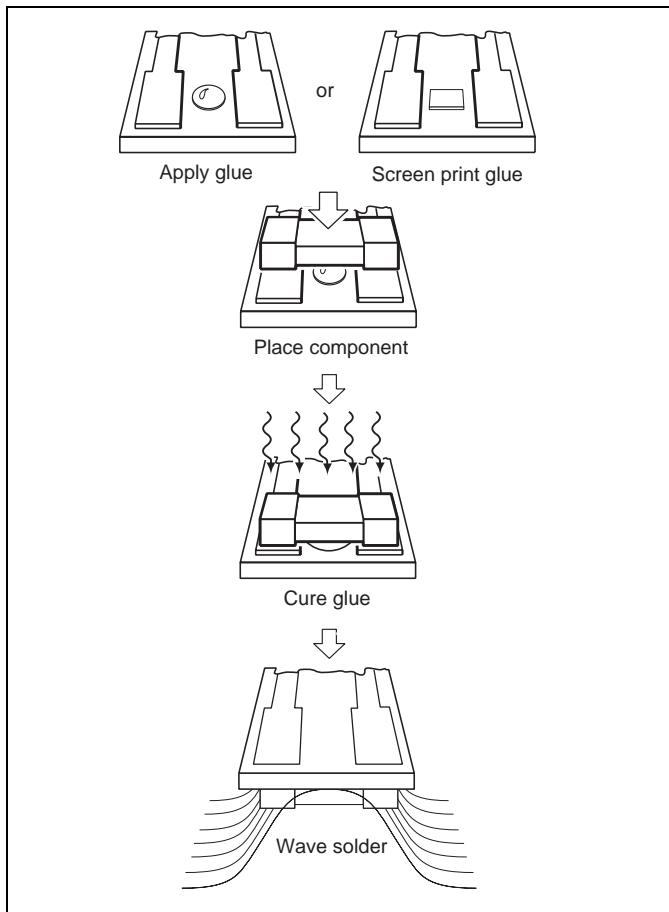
Wave Soldering PCBs With Surface Mount Devices Only
